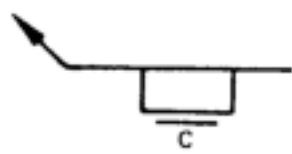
Surface contour of plug welds and slot welds with user's standard finish symbol.
